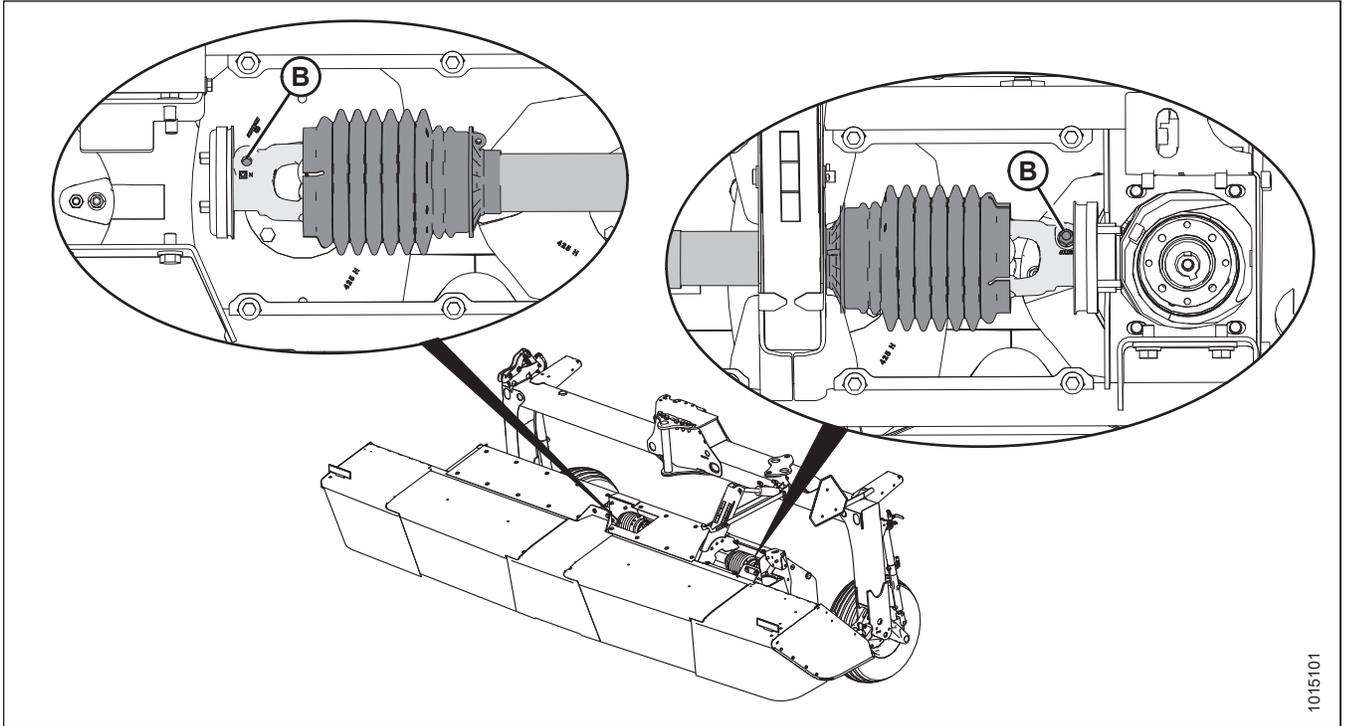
Cross Shaft Driveline Taper Pin Locations
